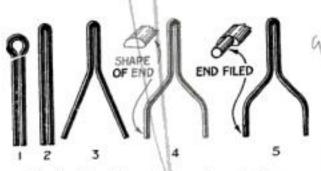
Steps in making a valve-grinding tool from a heavy split cotter key
